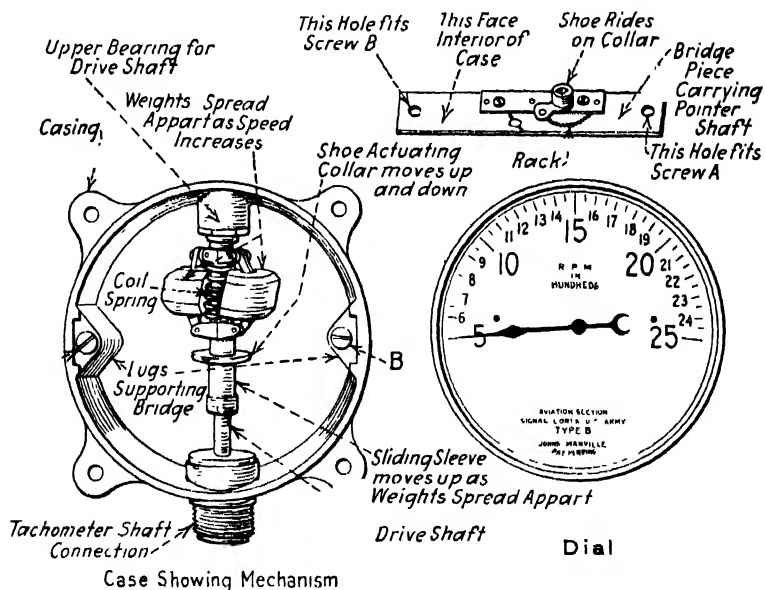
The Johns-Manville Tachometer, a Typical Centrifugal Type. Casing Shown with Dial Removed to Depict Flyweight Governor Design.
